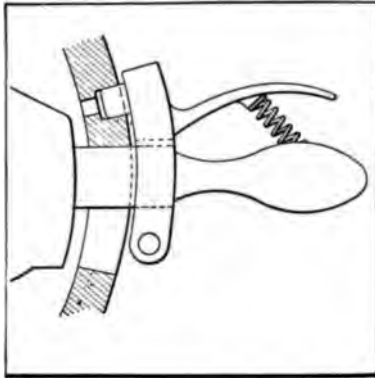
Withdrawing and Locking Device on Change-gear Box
